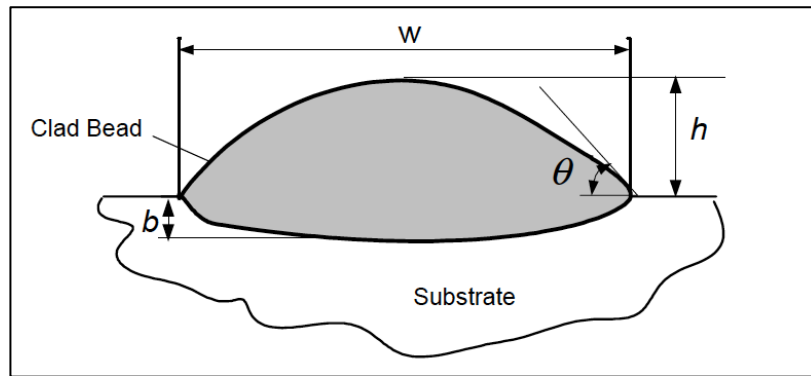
Typical cross-sectional clad bead profile [3].
